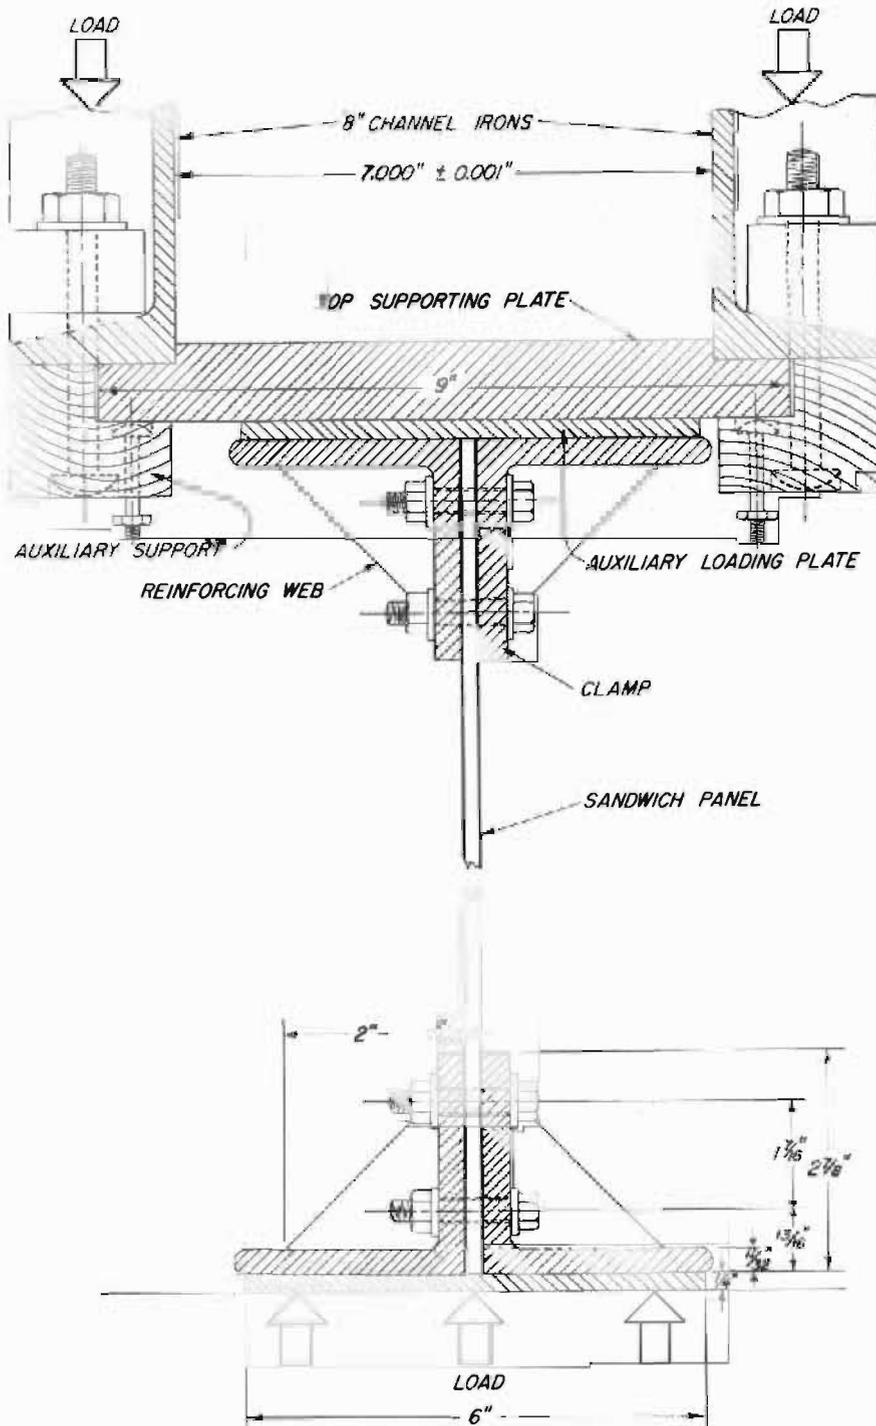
Sketch showing the clamping fixtures at the loaded edges of the panel.
